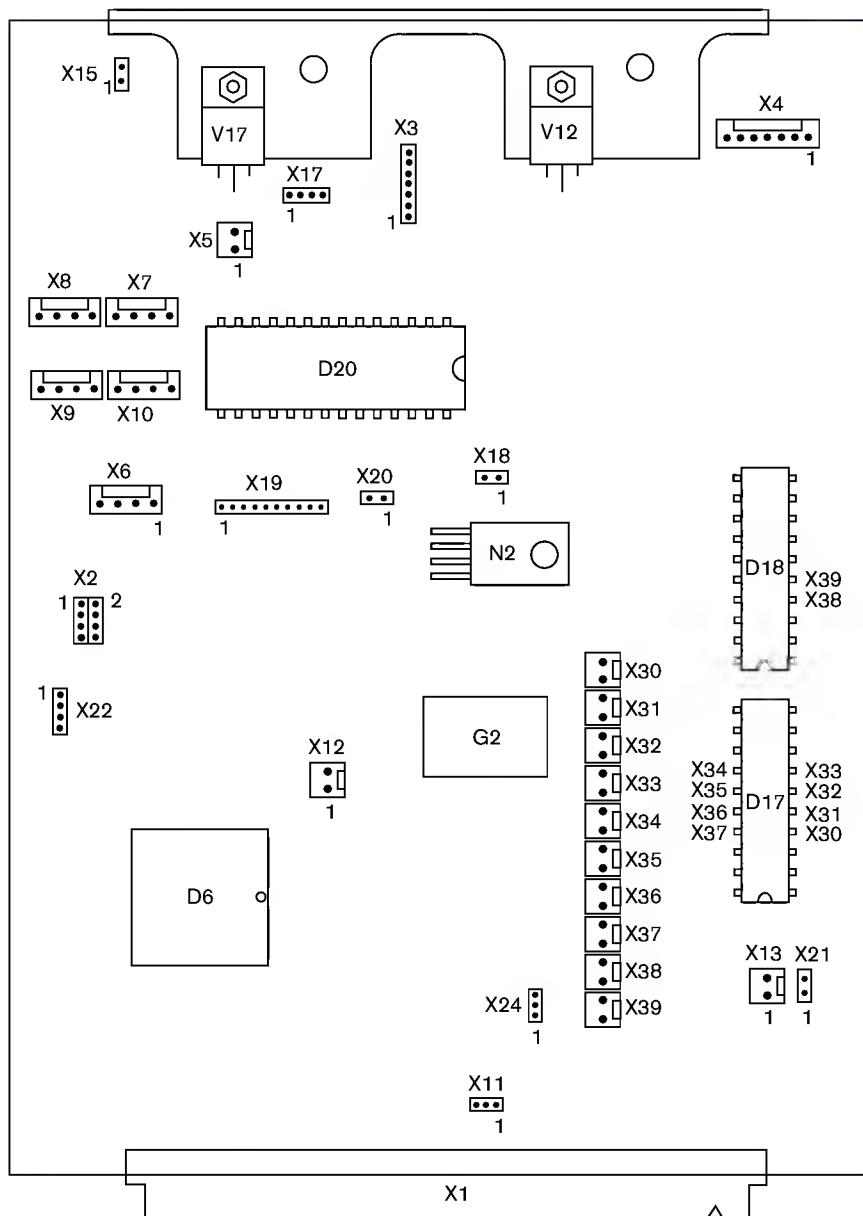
Component mounting diagram of the Pneumatics Controller PCB
